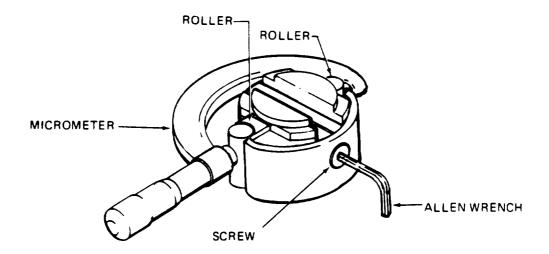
Adjusting Fuel Injection Pump Roller-to-Roller Dimension
